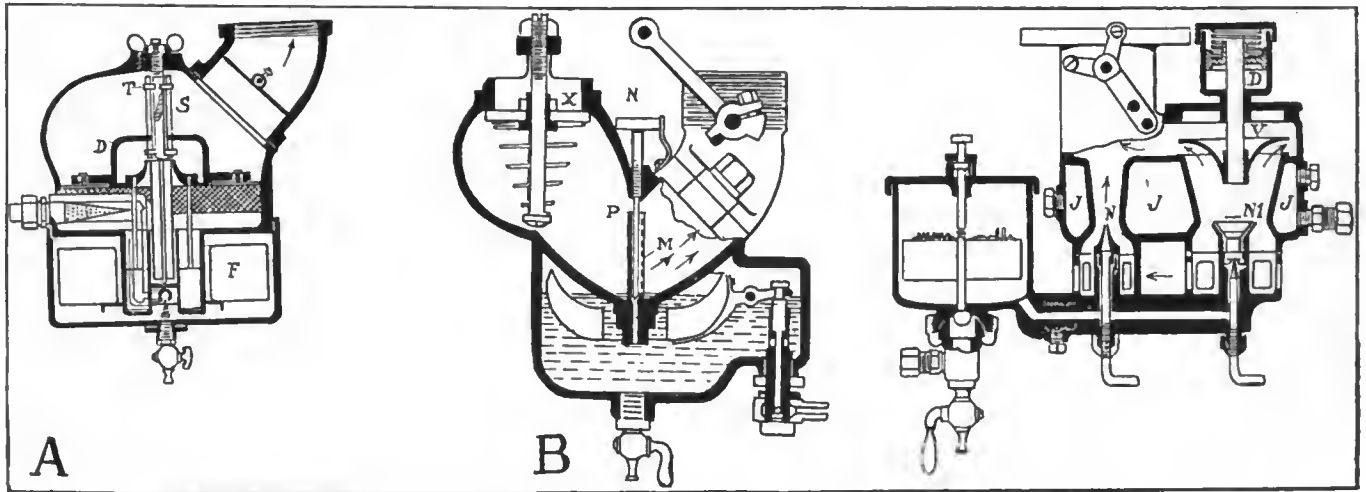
A is a Duryea vaporizer. B presents the Bennett carbureter. C depicts a Willet carbureter in section
